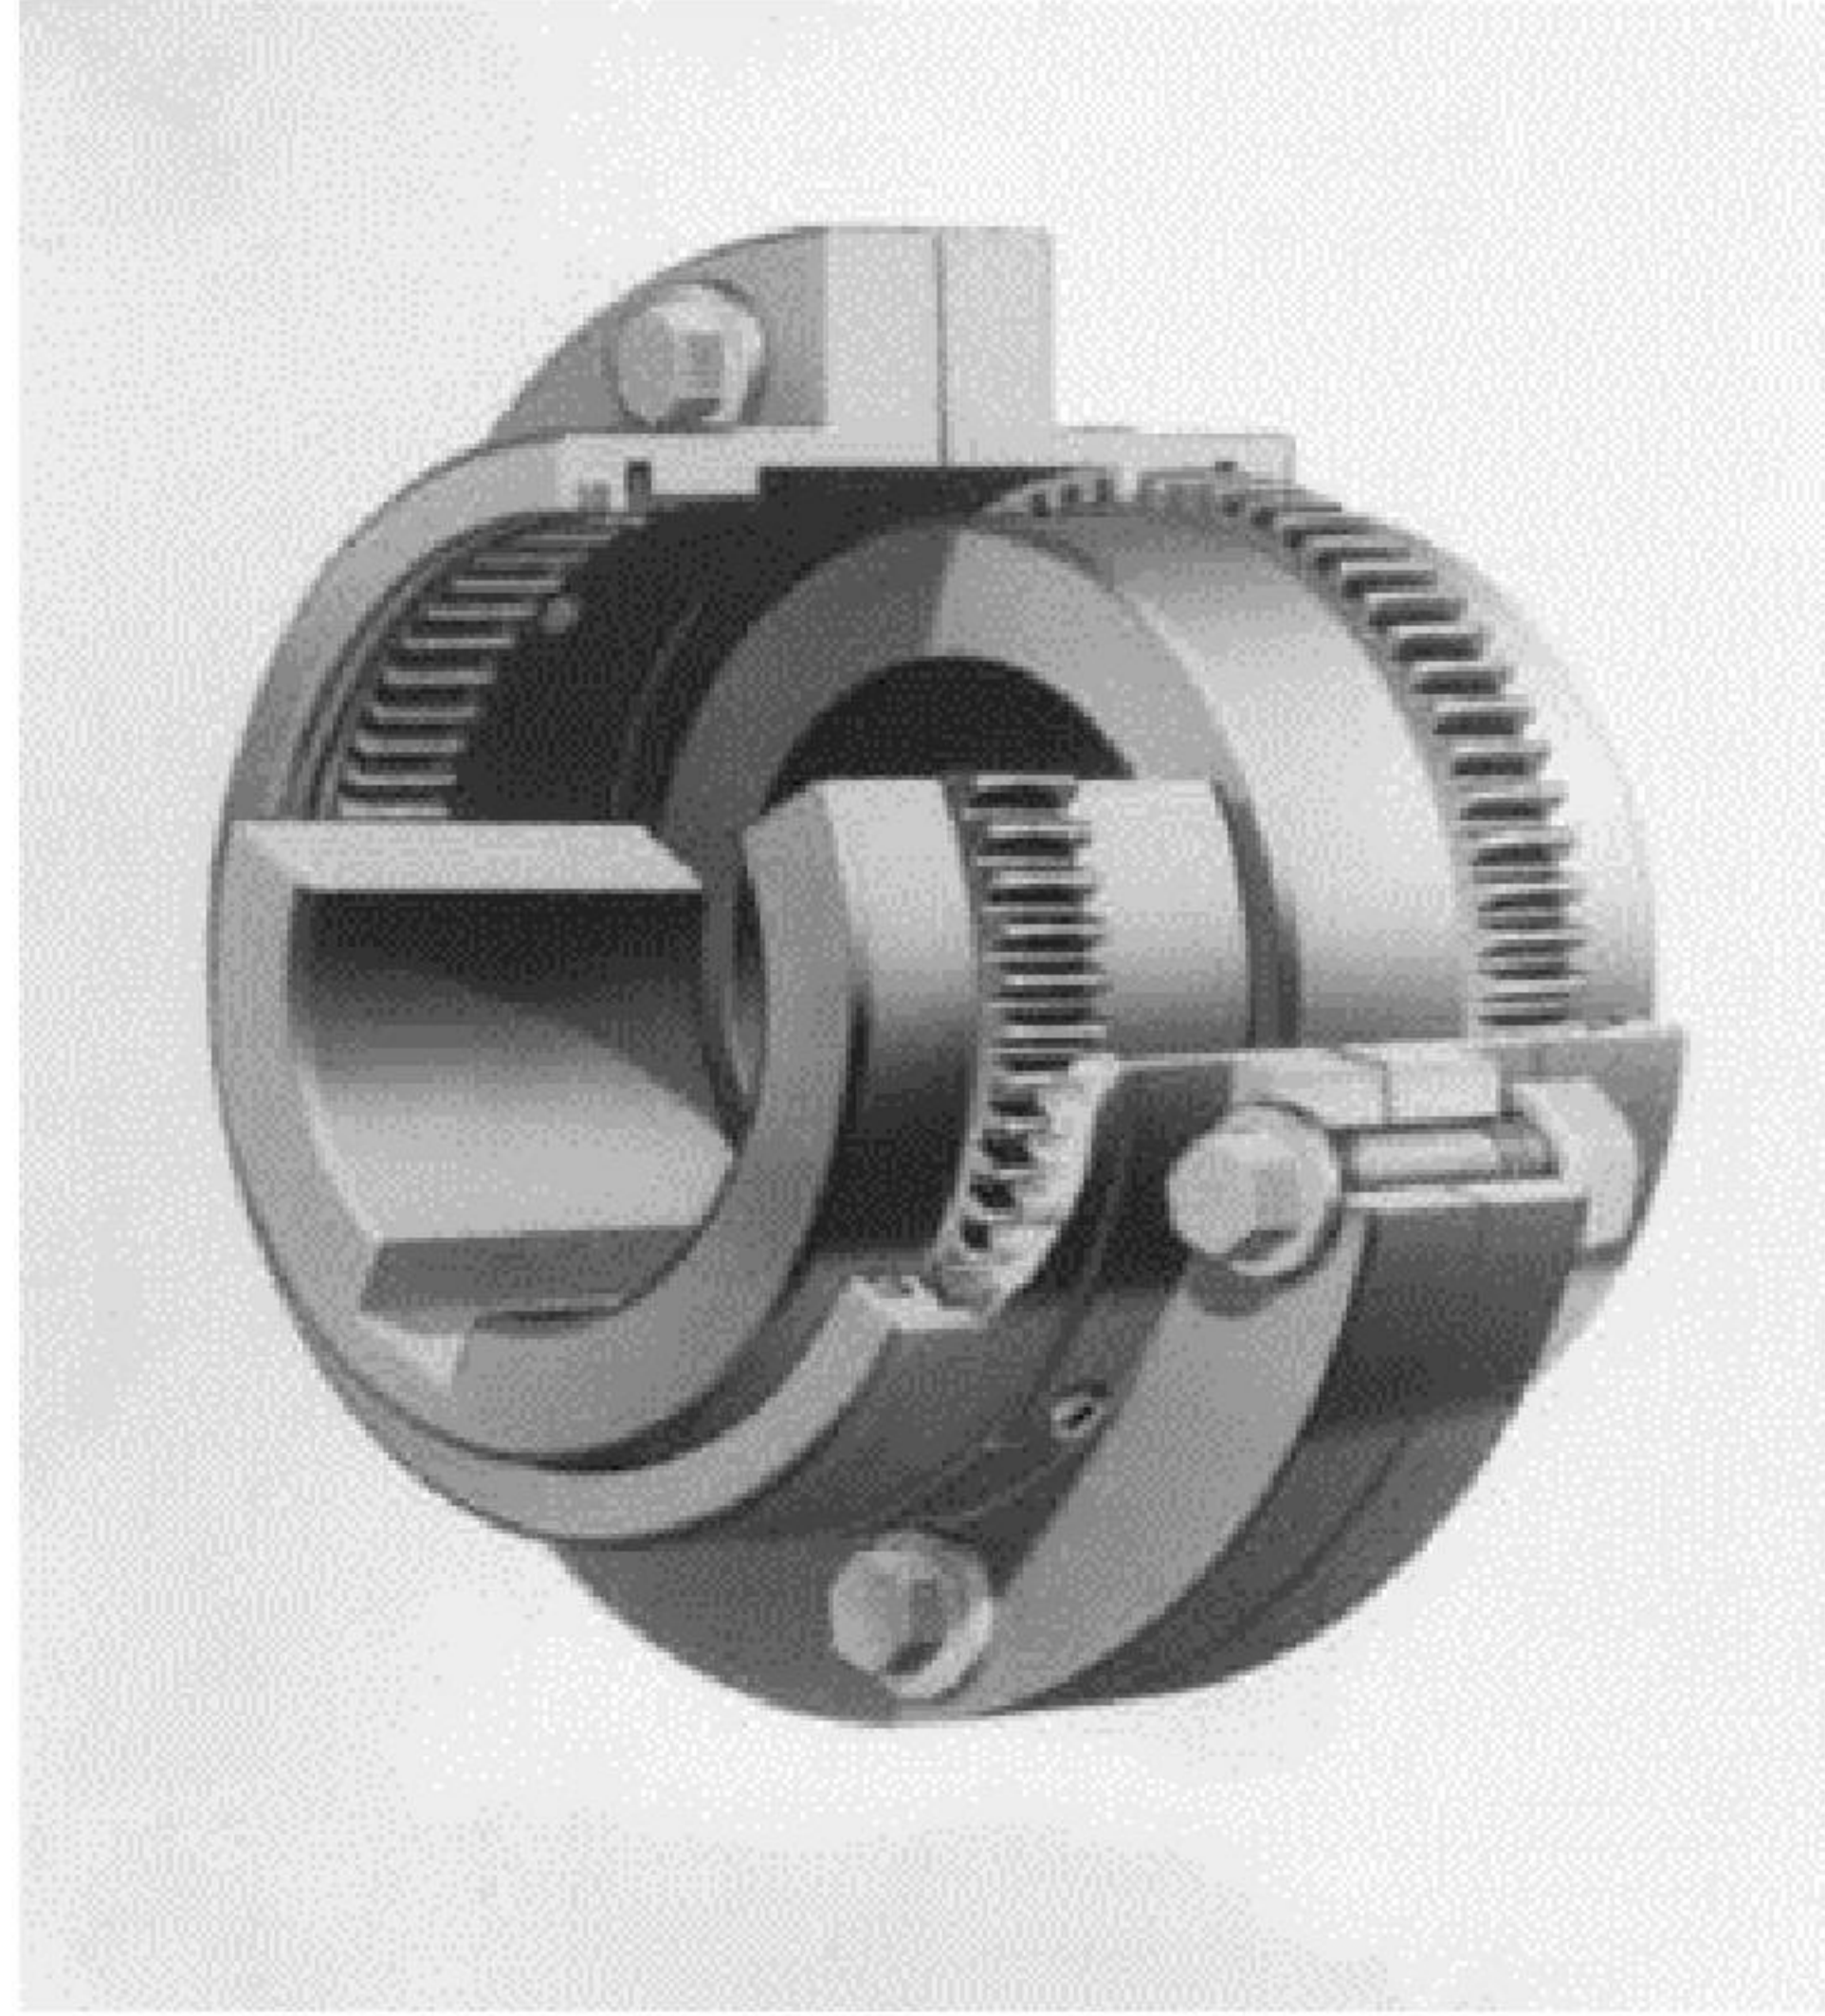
Gear-tooth coupling, standard double-engagement type. (*The Falk Corporation.*)
